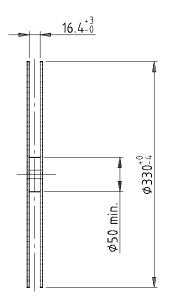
Issue: 4; 12.06.13
